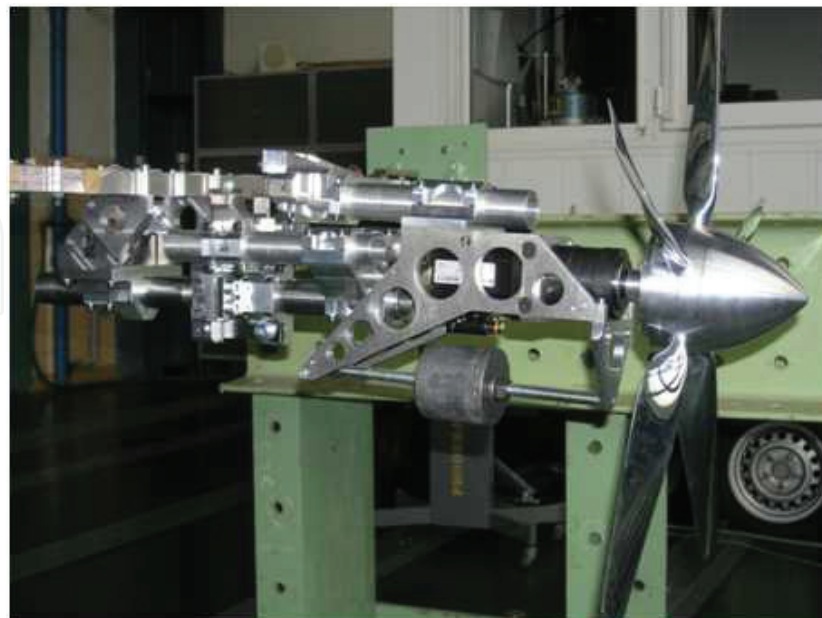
Design solution of W-WING demonstrator engine attachment, motor, and propeller.
